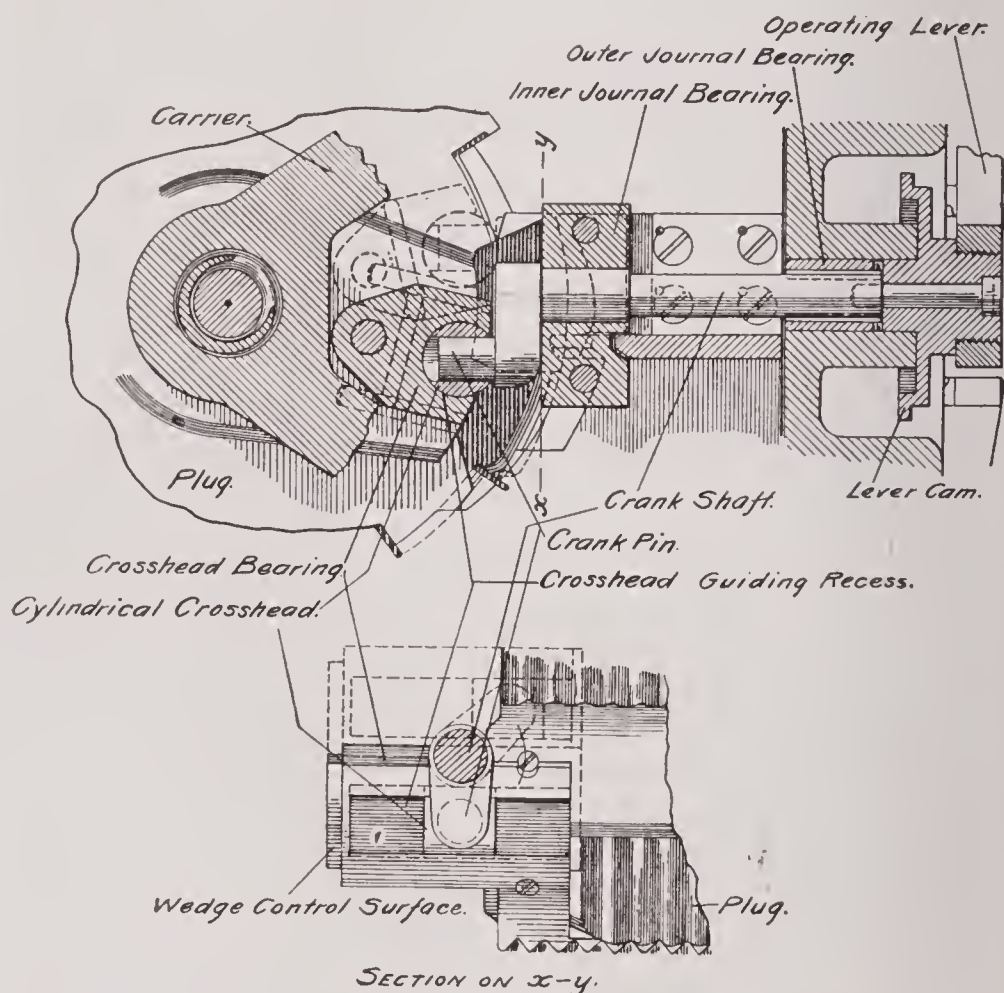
OPERATING-MECHANISM FOR 5-INCH BREECH-MECHANISM, MARK VII.
